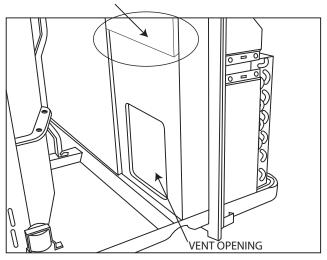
Cut & Remove Insulation Above Vent Opening
